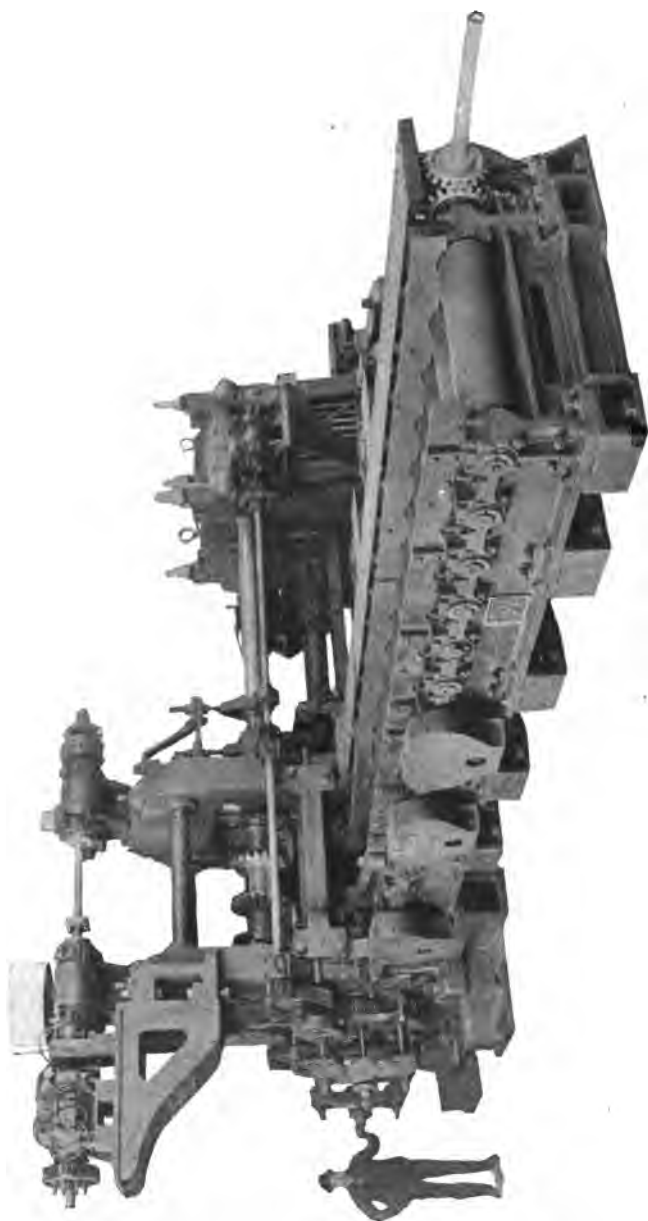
30-Inch Universal Plate Mill. (United Engineering and Foundry Co.)
